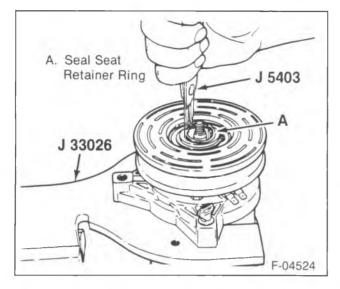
Removing or Installing the Shaft Lip Seal Retaining Ring
